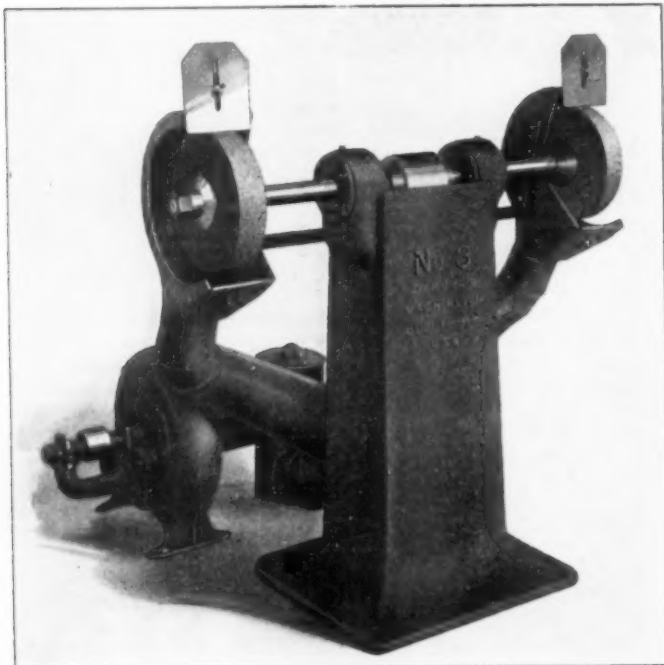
GARDNER NO. 2 BALL BEARING POLISHING LATHE.
